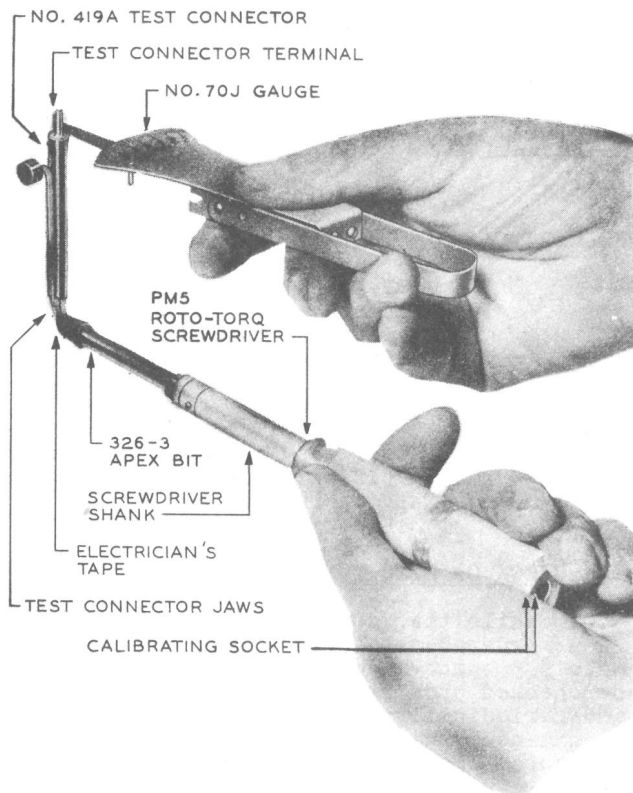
Method of Checking Roto-Torq Screwdriver
